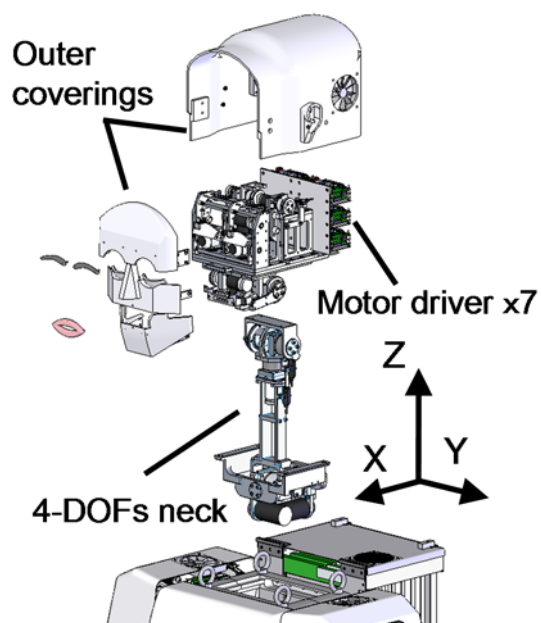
22 Exploded view of the head, the neck, and the outer covering
